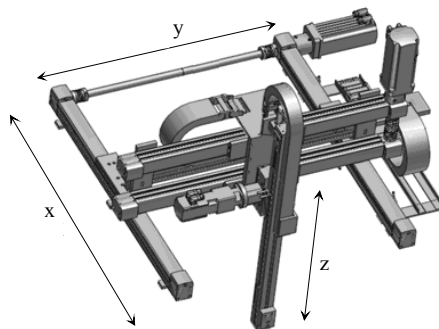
Test system mechanical layout shown with the most essential components. The x - and y -axes are directly driven by servomotors. The z -axis is driven by a gear servomotor.
